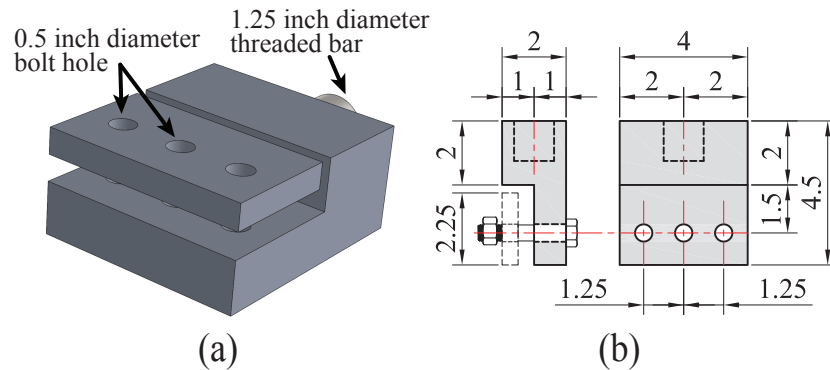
Design of the loading grip for bolted flat specimens: (a) perspective view and (b) top and side view (units: inch).
